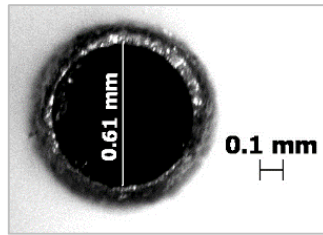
A microscopic view of the tip opening of a modified Pitot tube.
